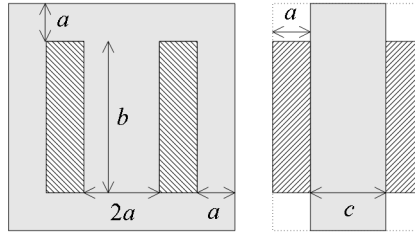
Single-phase/3-limb transformer's front and side views
